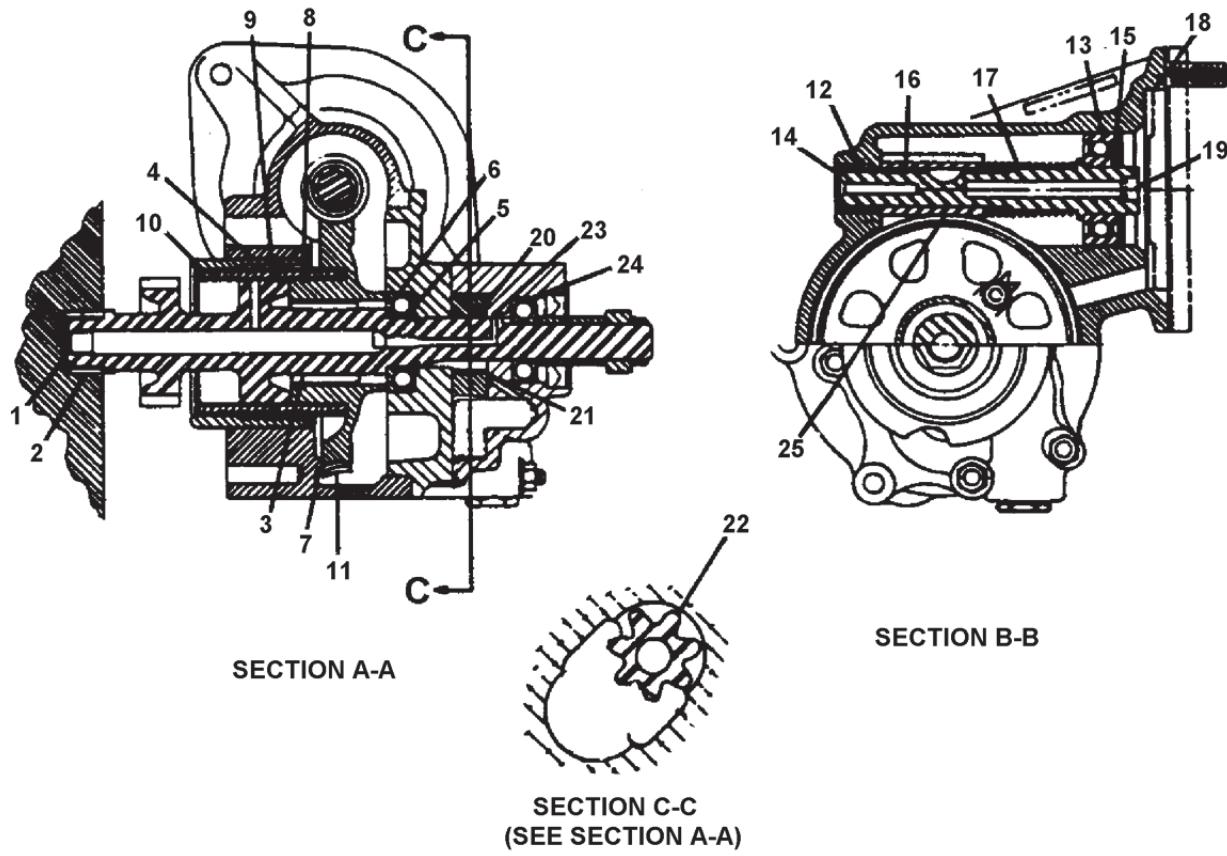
Starter and Starter Adapter with Scavenge Pump Dimensions
